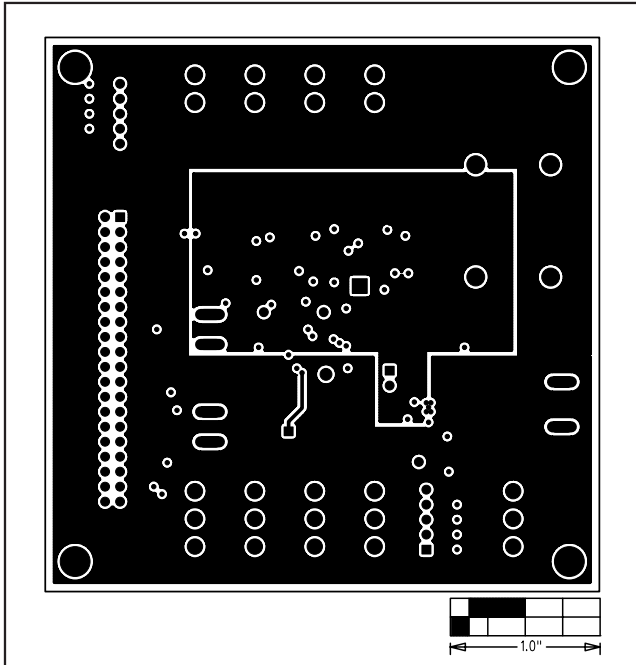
MAX13036 EV Kit PCB Layout—Layer 3 (Power)
